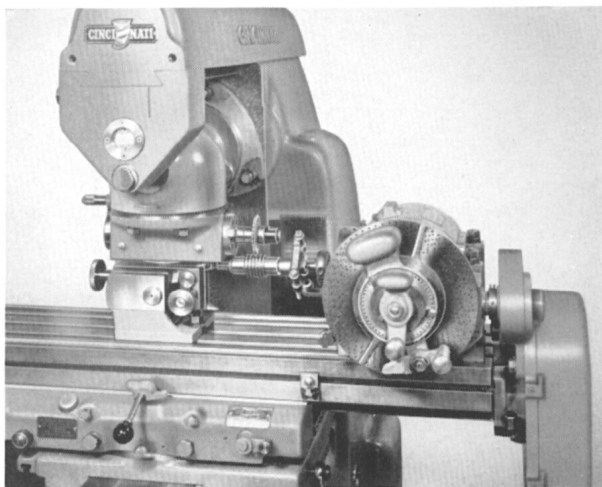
Milling a worm with a universal spiral milling attachment with wide range divider, and a short lead attachment.
